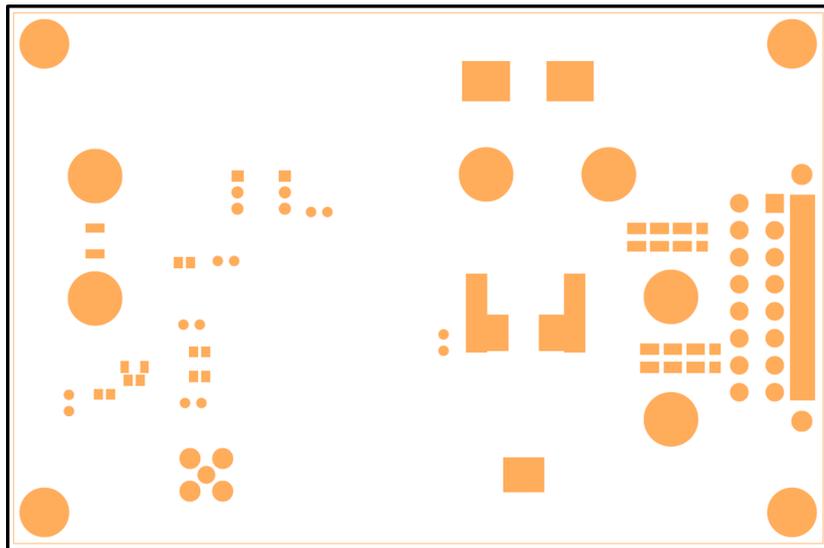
EPC7C005/FBS-GAM02 POL Evaluation Board Bottom Solder Mask
